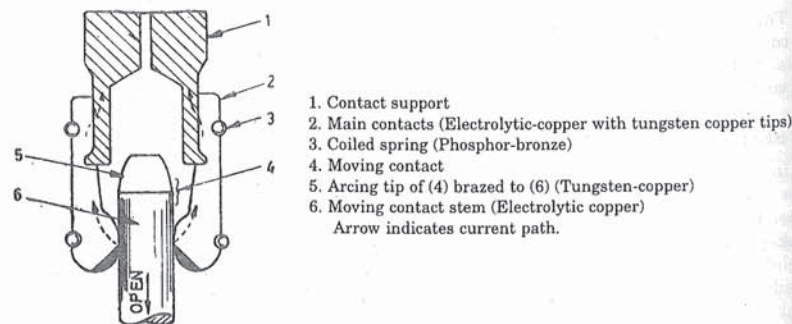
Typical finger contact assembly in oil circuit-breakers.
